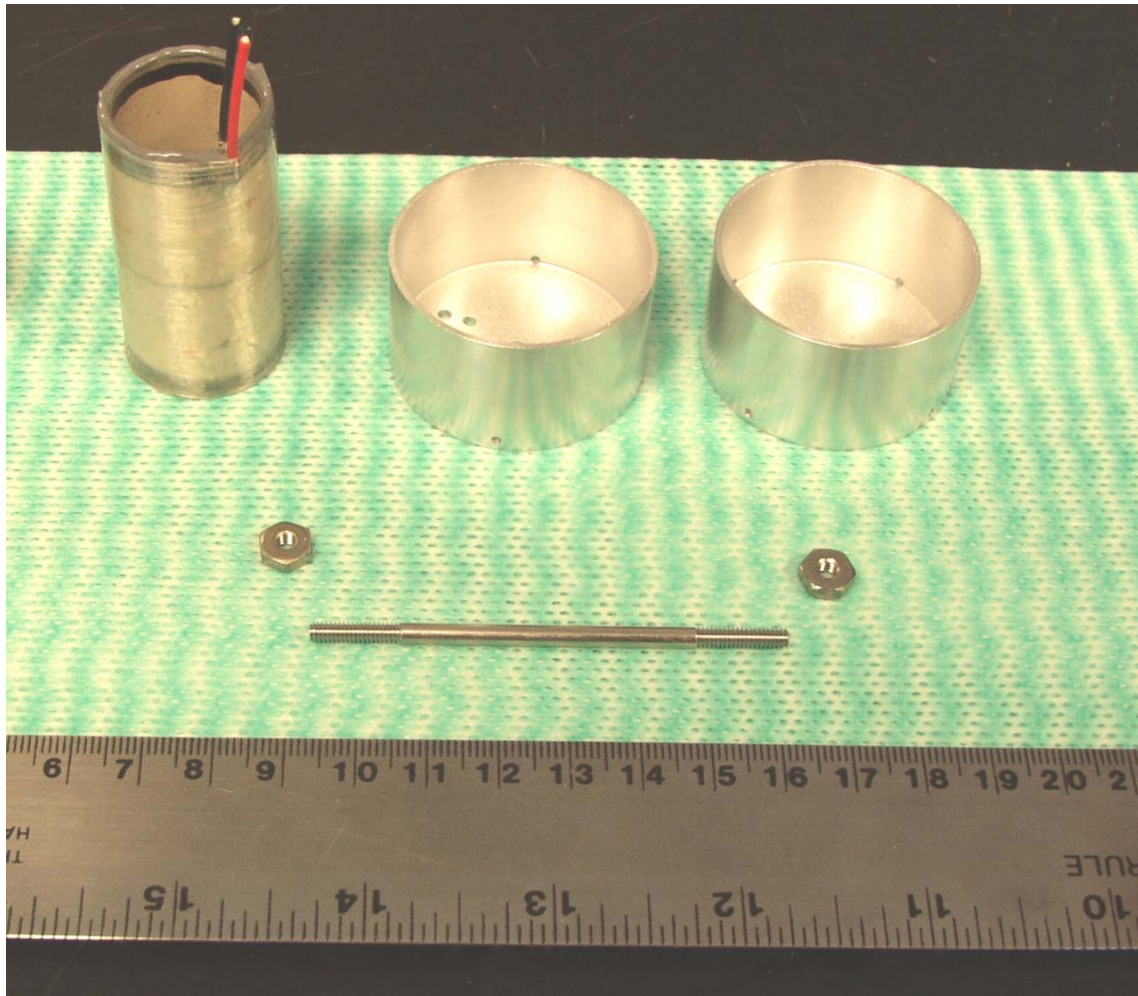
DSP² parts including PZT drive stack, stainless steel prestress rod and nuts and aluminum endcaps.
